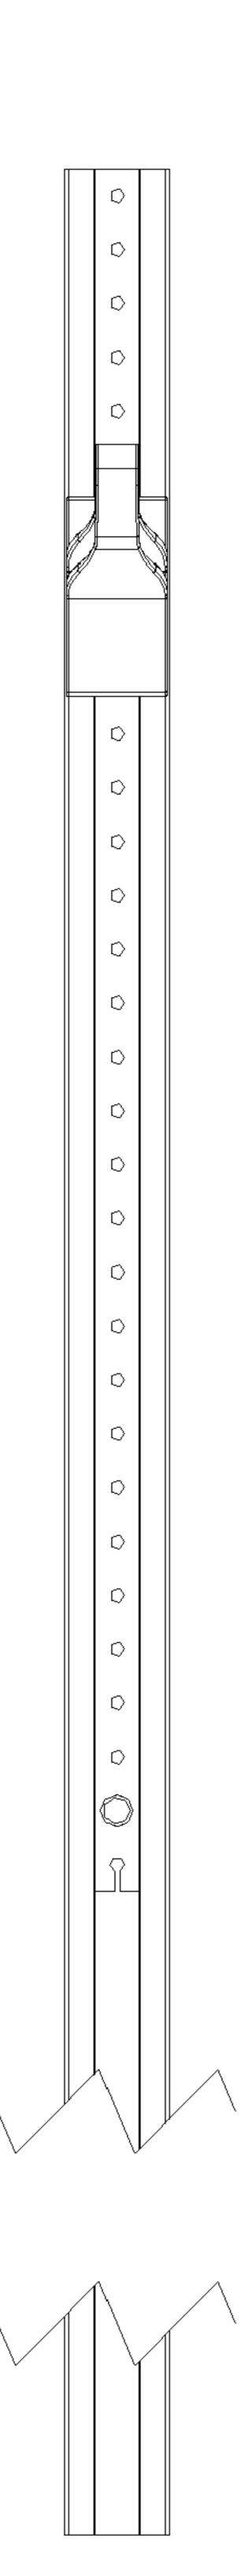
is a top view of the twist in shelving support bracket arm and support assembly; and,
